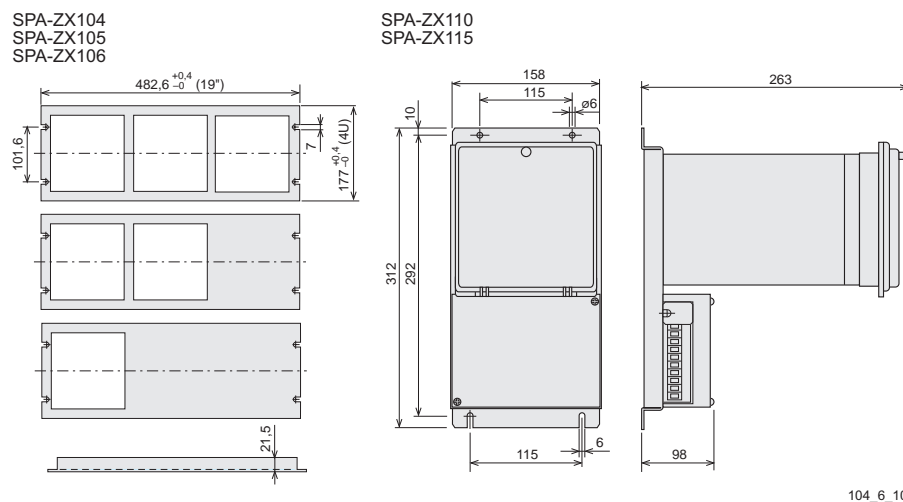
Mounting cabinets and frames as well as projecting mounting (dimensions in mm)
